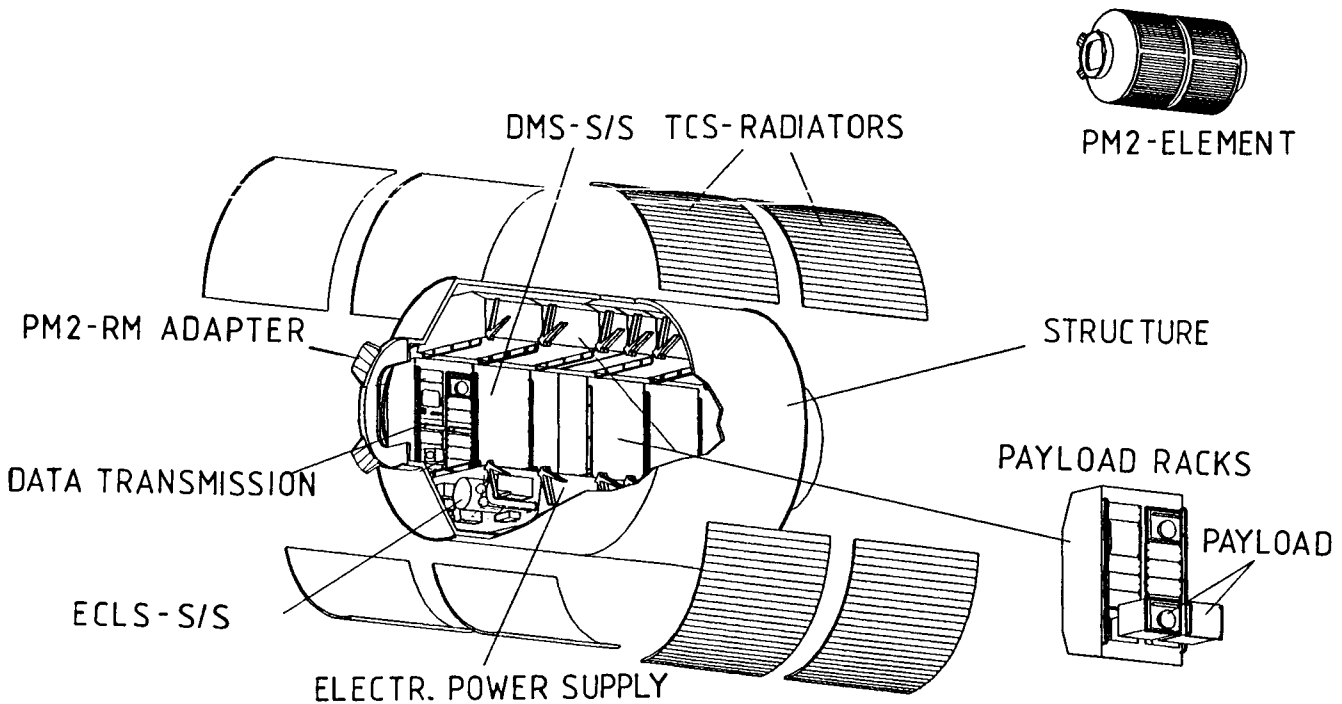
Pressurized Module (PM2-Element) Exploded View
